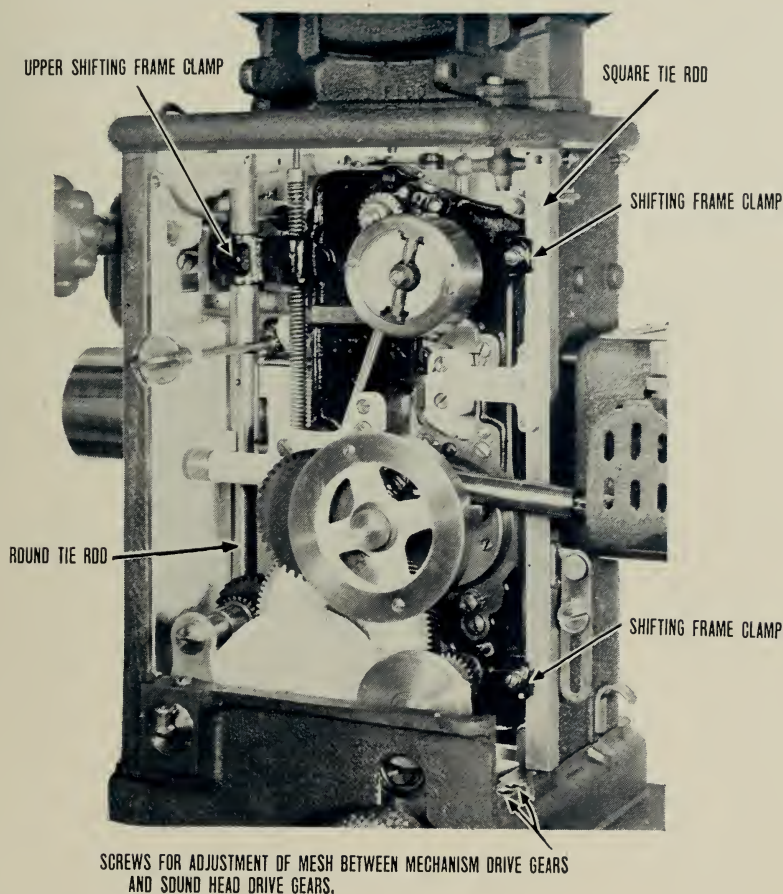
Gear side of mechanism, showing tie rods and adjustment of mesh between mechanism and sound head gears
